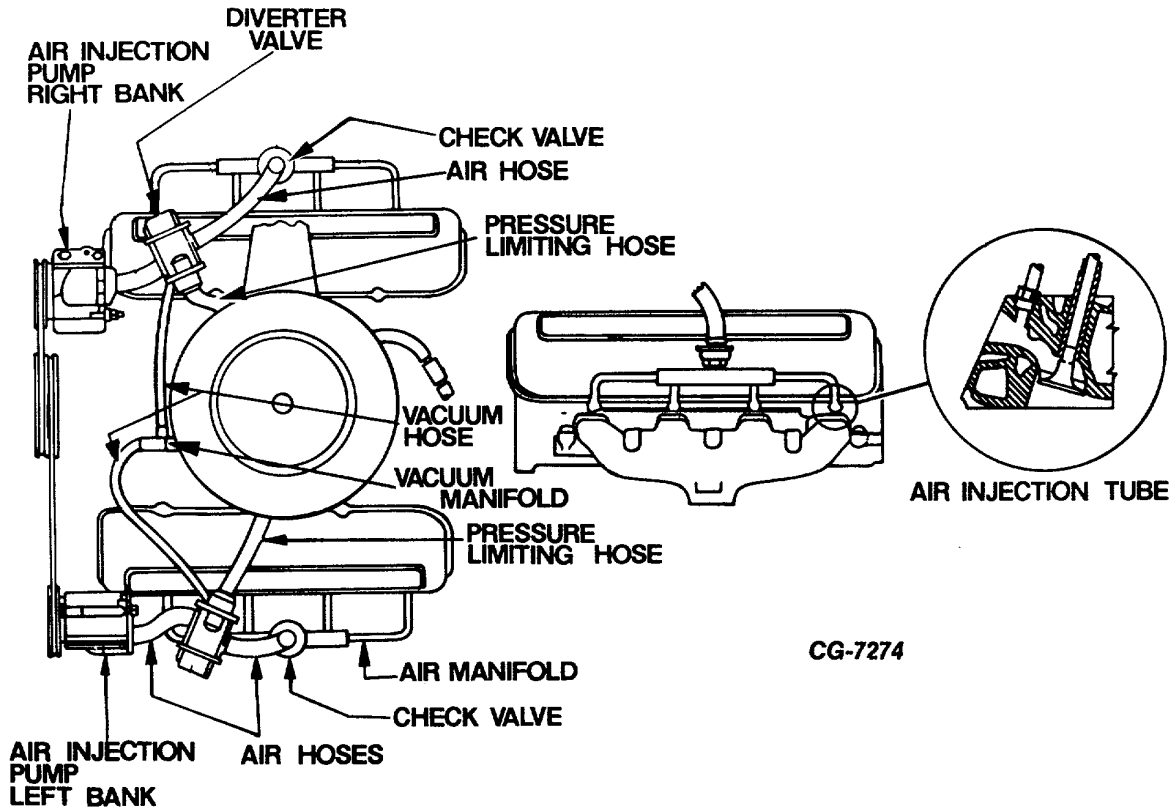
Air Injection System Used on Small V8 Engine (For California)
